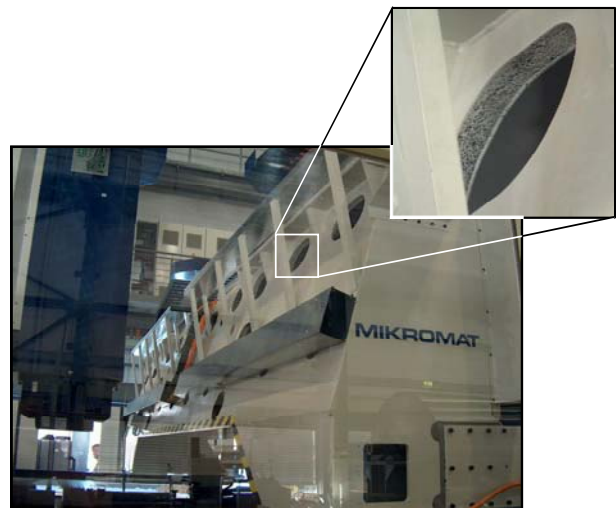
Cross beam of a milling machine of steel-aluminium foam sandwiches;
